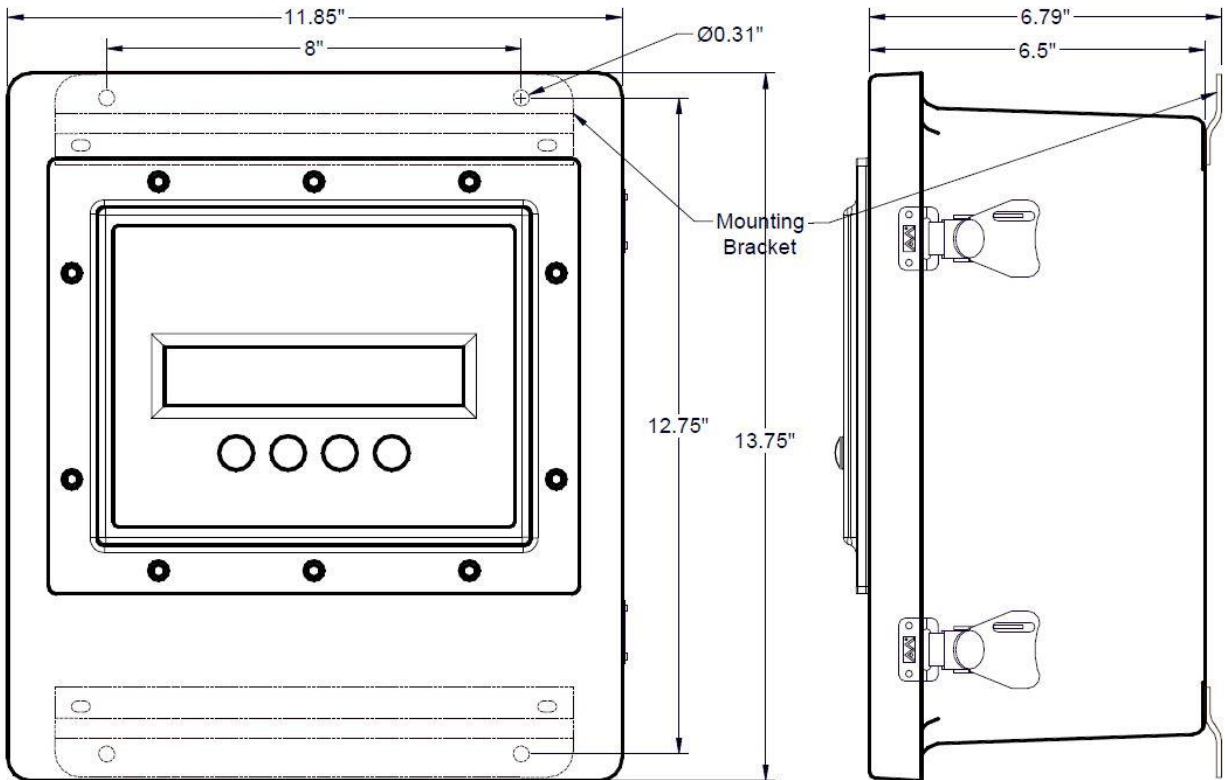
X40-08-N4X MOUNTING AND DIMENSIONS
